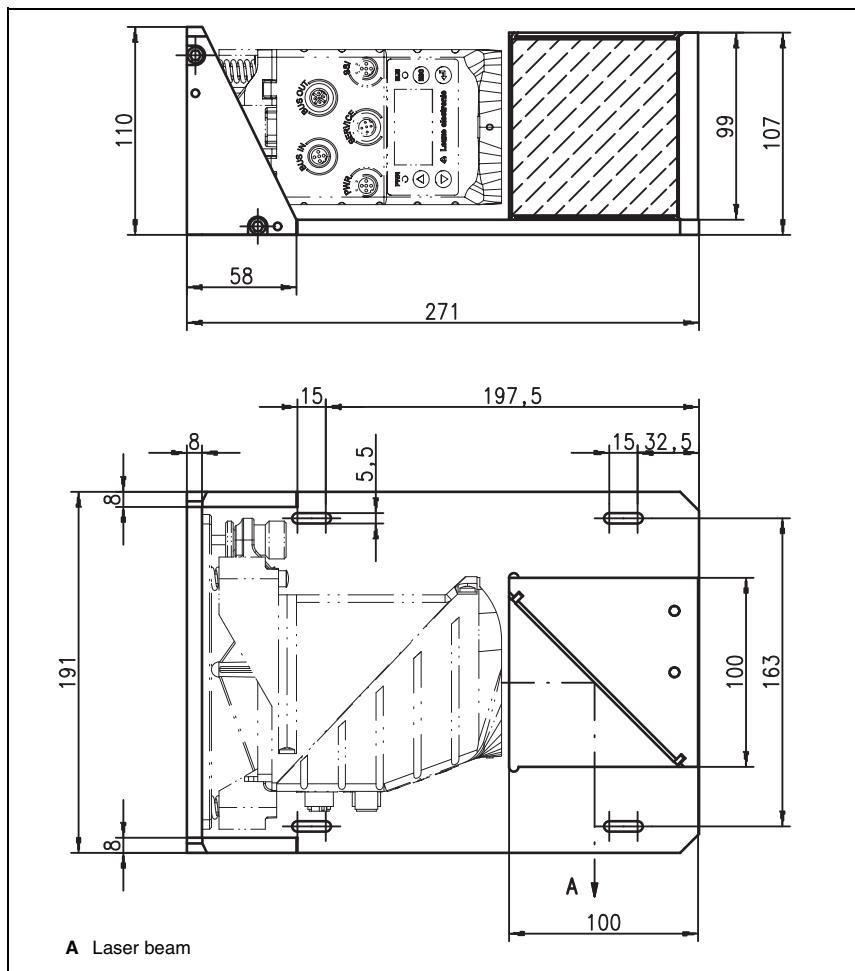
Dimensioned drawing of US AMS 01 deflector unit
